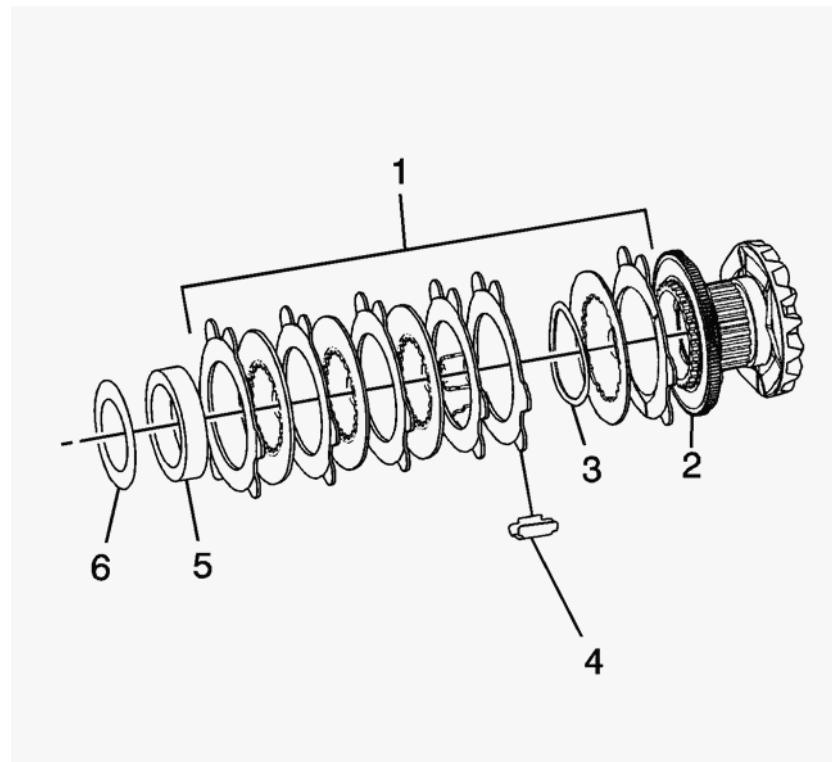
Disassembled View Of Locking Differential Side Gear Components
